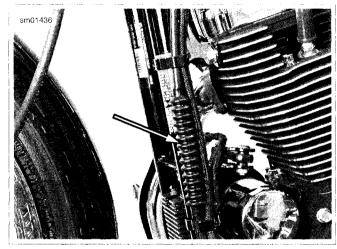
Clutch Cable Adjuster Location: XL Models
